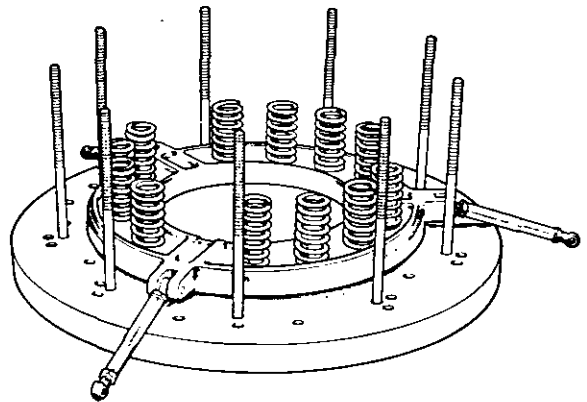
ASSEMBLING PTO PRESSURE PLATE
